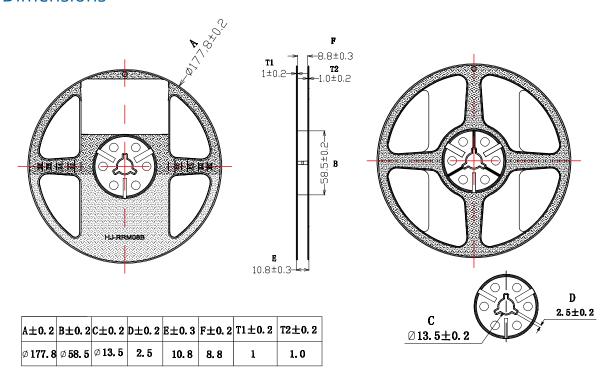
Reel dimensions for LUXEON 2835 Color Line.
